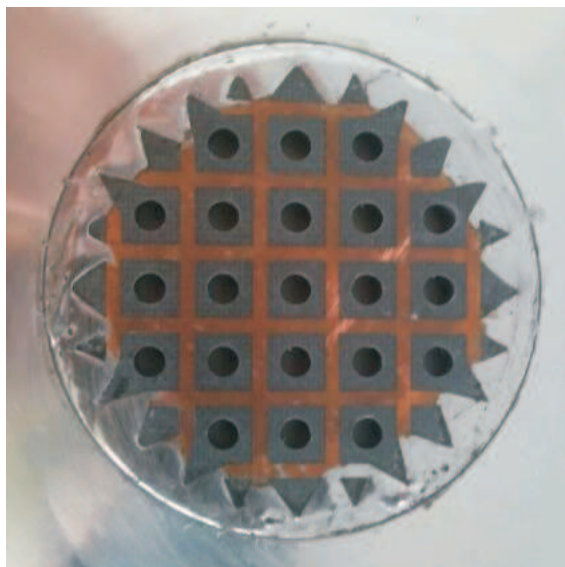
PCB soldered to an aluminum cone with a brass ring in the center.
